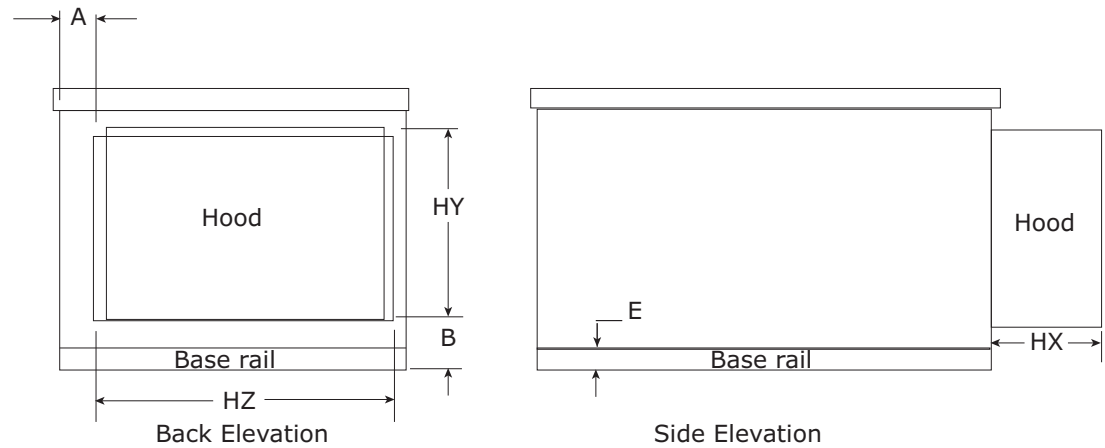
Vertical motorized impeller front/back hood dimensions (inches)
